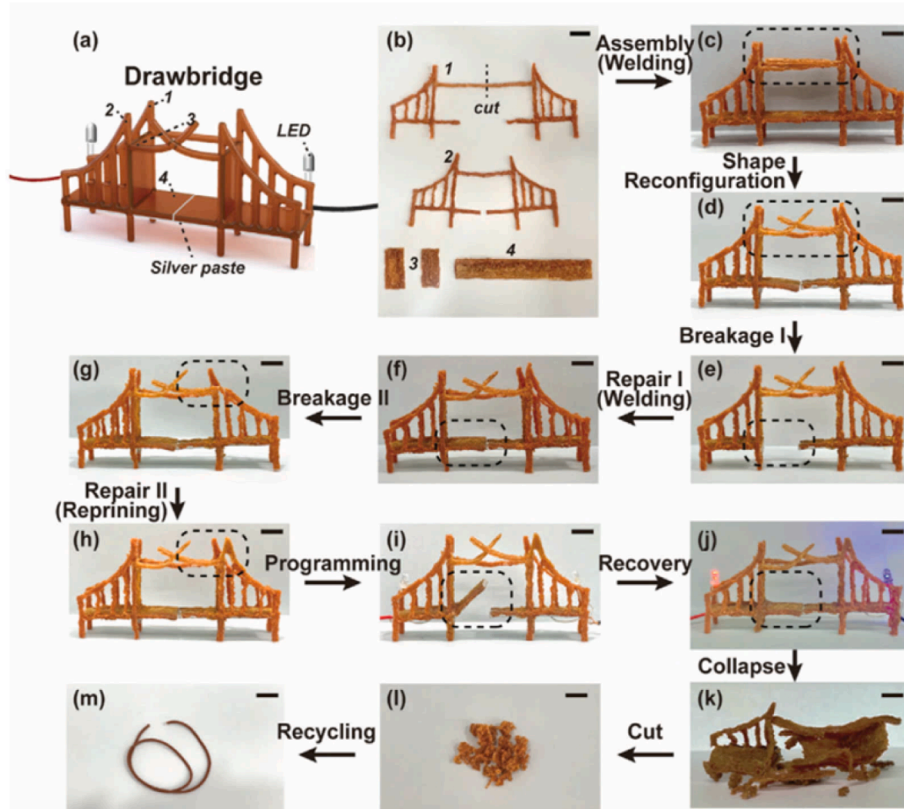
Pictures of the multifunctional 3D printing capability of synthetic vitrimers: (a) mobile bridge printed with handheld FDMTM-based 3D printing and welding technique, (b) assembly schematic of printed mobile bridge components, (c) mobile bridge assembled with welding technique, (d) Reconfiguration of the movable bridge, (e) Schematic of the broken bridge, (f) Repaired bridge through welding, (g) Reconfiguration of the broken movable bridge, (h) Repaired bridge through reprinting, (i) Shape programming, (j) Shape recovery, (k) Collapsed vitrimer bridge, (l) Cut bridge pieces for recycling, (m) Reprocessed vitrimer filament for reprinting (Reproduced from [155] under an open access Creative Commons license).
